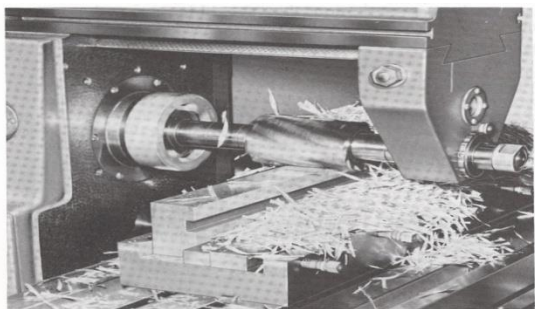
0:28 Milling the surface of a work piece held in a fixture.
